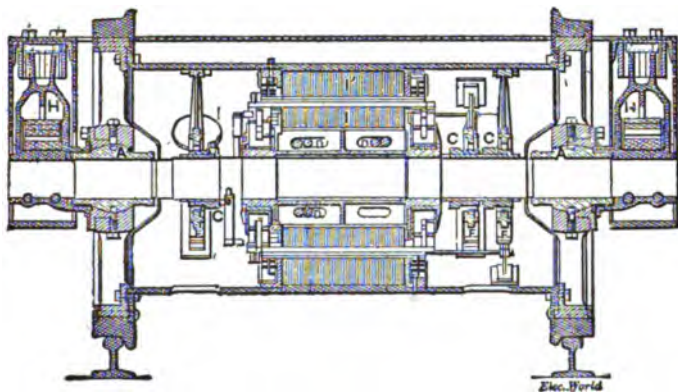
MOTOR OF HEILMANN LOCOMOTIVE.
